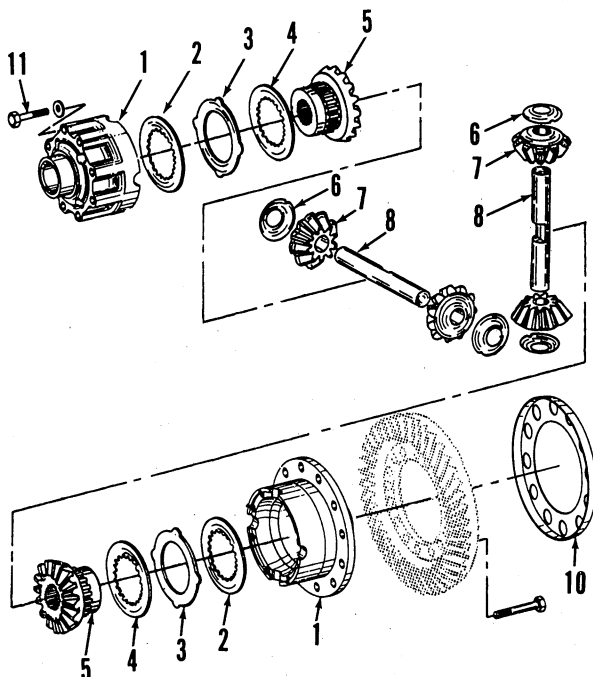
Exploded view of limited slip differential used in mechanical front-wheel drive axle on Models 4650 and 4850. Refer to Fig. 25 for identification of parts. Eight discs (2) and 10 separator plates (3) are used on these models.
